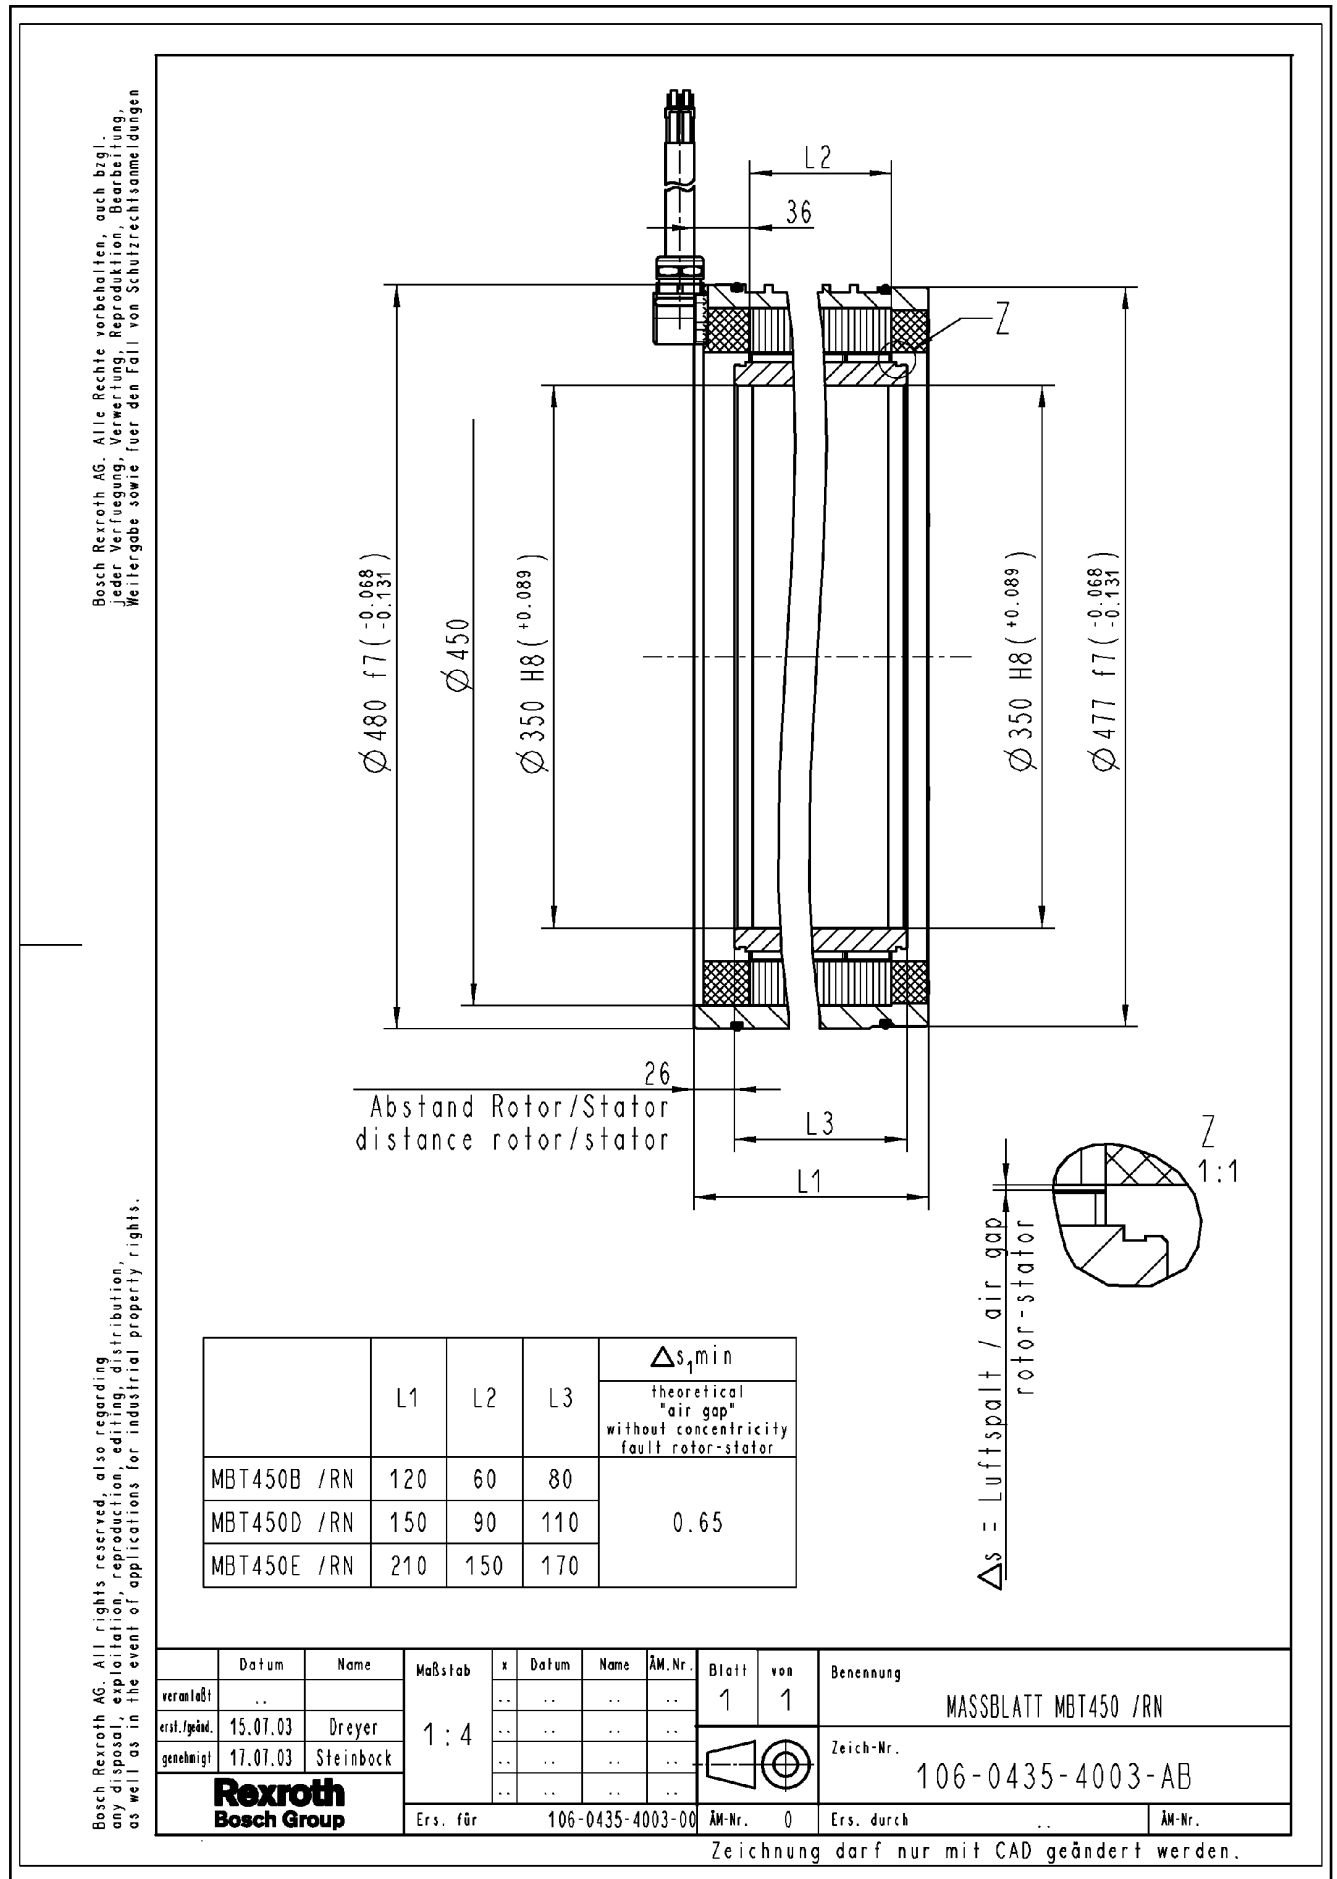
Dimension sheet for frame size 450, electrical connection "RN"
